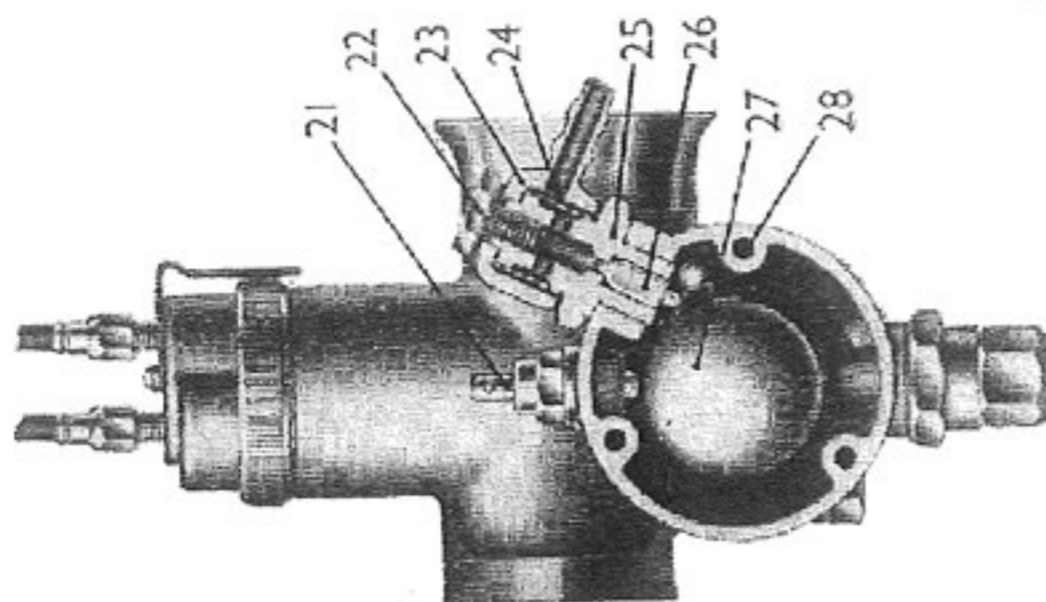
Section through mixing chamber, showing air valve and throttle closed
